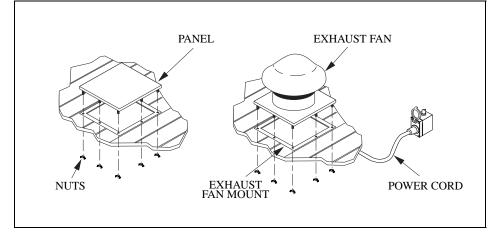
Dismounting the exhaust fan on top of the CBL ISO
